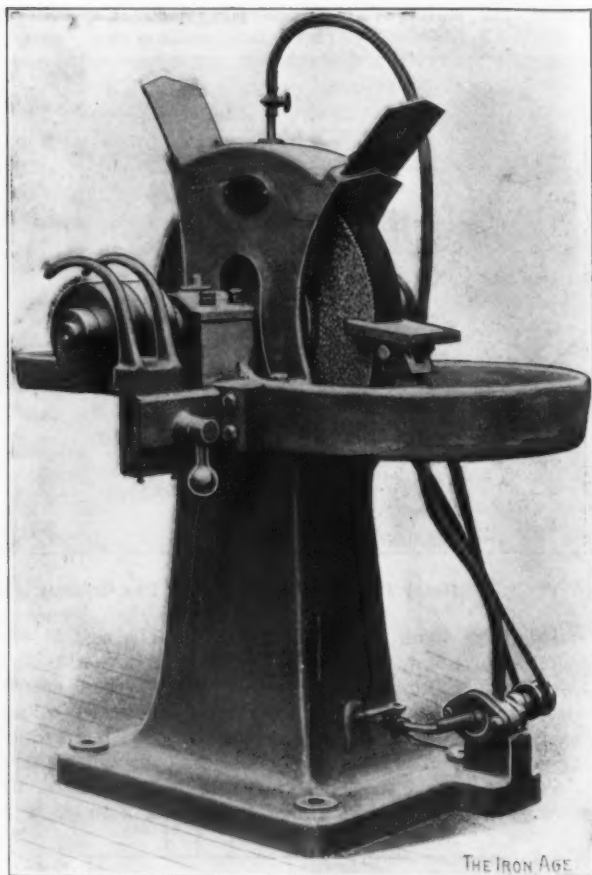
A Single Wheel Protected Wet Tool Grinder.
